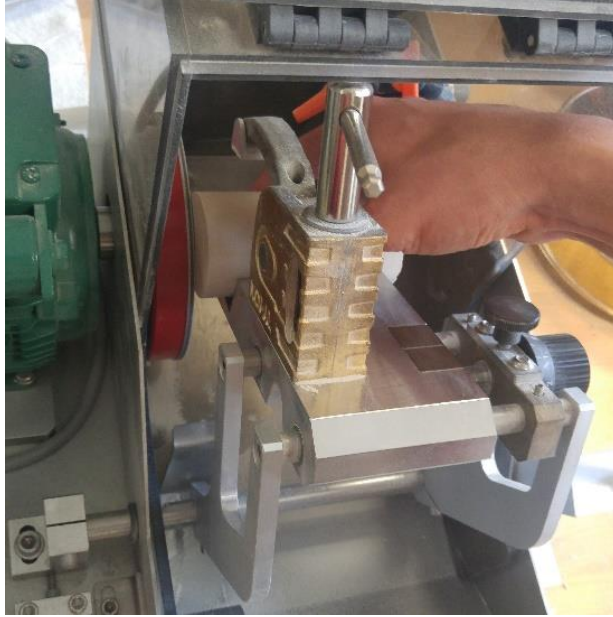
Placing of the specimen in the v-block touching the grinding wheel
